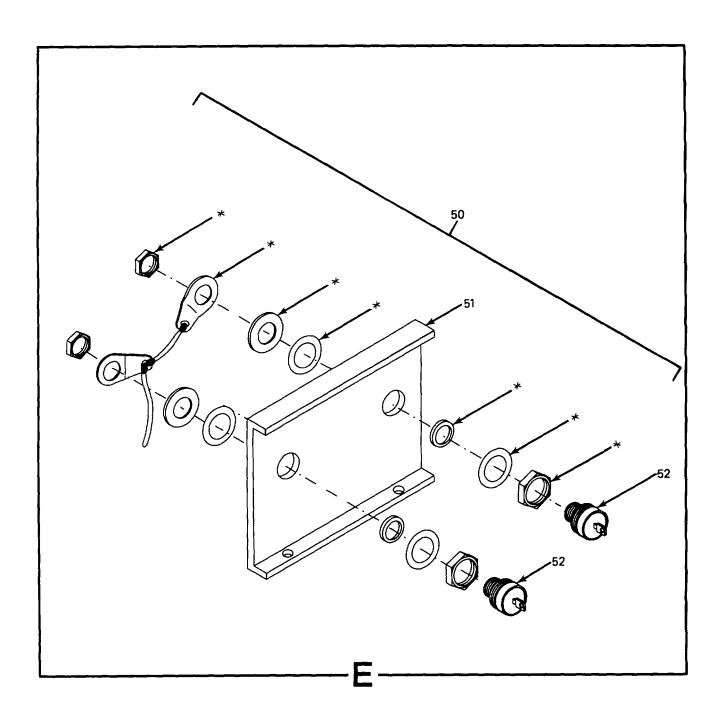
BOTTOM PLATE ASSEMBLY (91-10004) (SHEET 3 OF 4)
